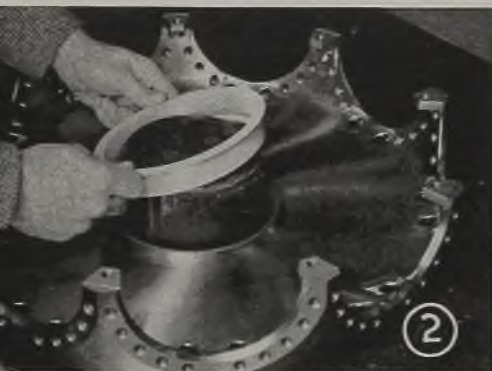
Crankcase section is placed in position shown and heated. The part then is removed from the heater and the bushing assembled, complete operation from conveyor back to conveyor requiring only 2 minutes
